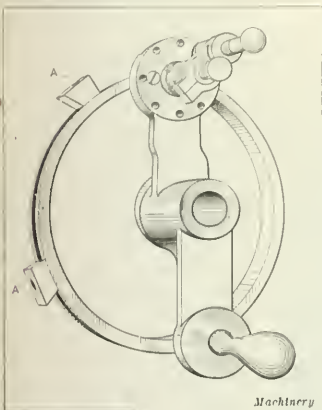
Special Index Crank designed for Use on Norton Plain Grinding Machines for truing Different Diameters on Wheel Face
